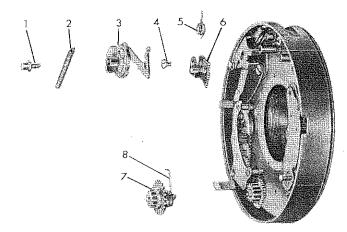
Parts on Shutter Mechanism Plate, Partially Exploded (I)
